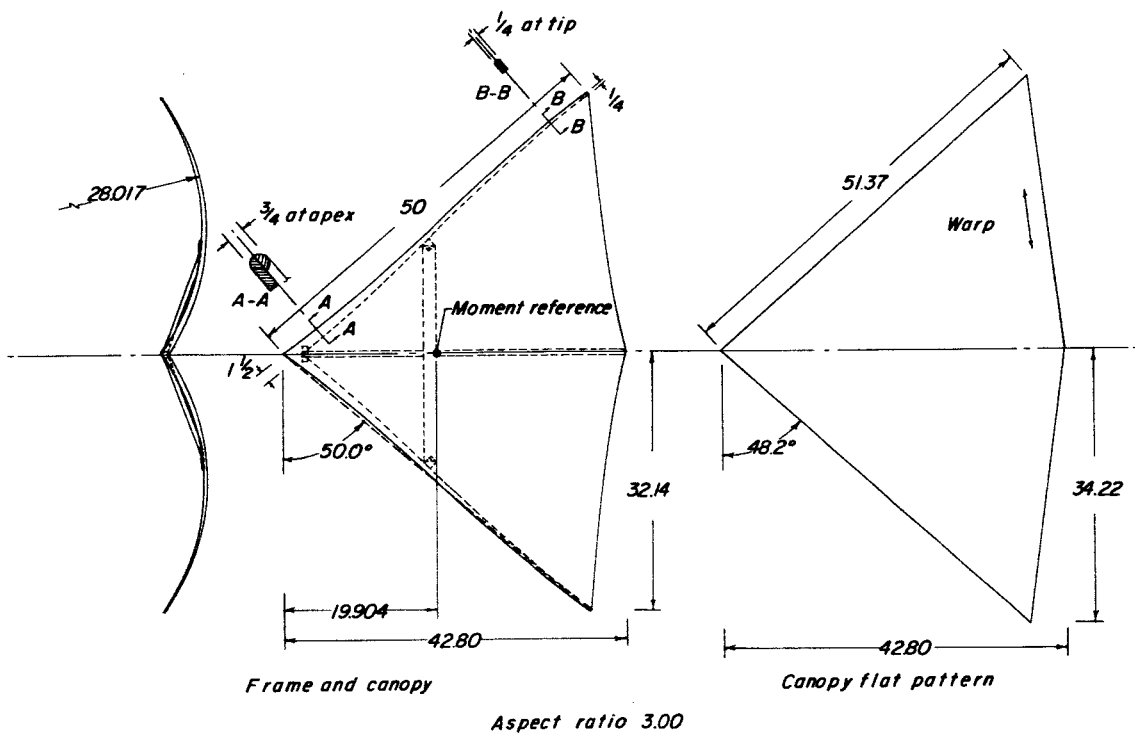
Geometry of cylindrical parawings. All dimensions are in inches unless otherwise indicated.
